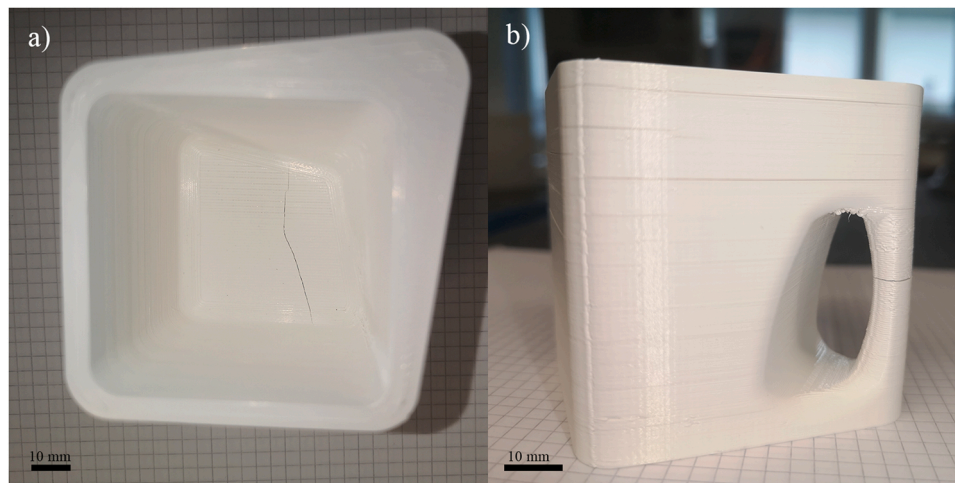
Cup printed using SiCeram filament showing a) cracks at the bottom, and b) inter-layer cracks after solvent debinding.
